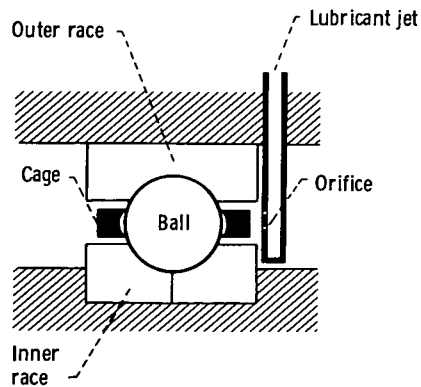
Bearing lubrication. Number of jets, two per bearing; dual orifice; inner-land riding cage.
